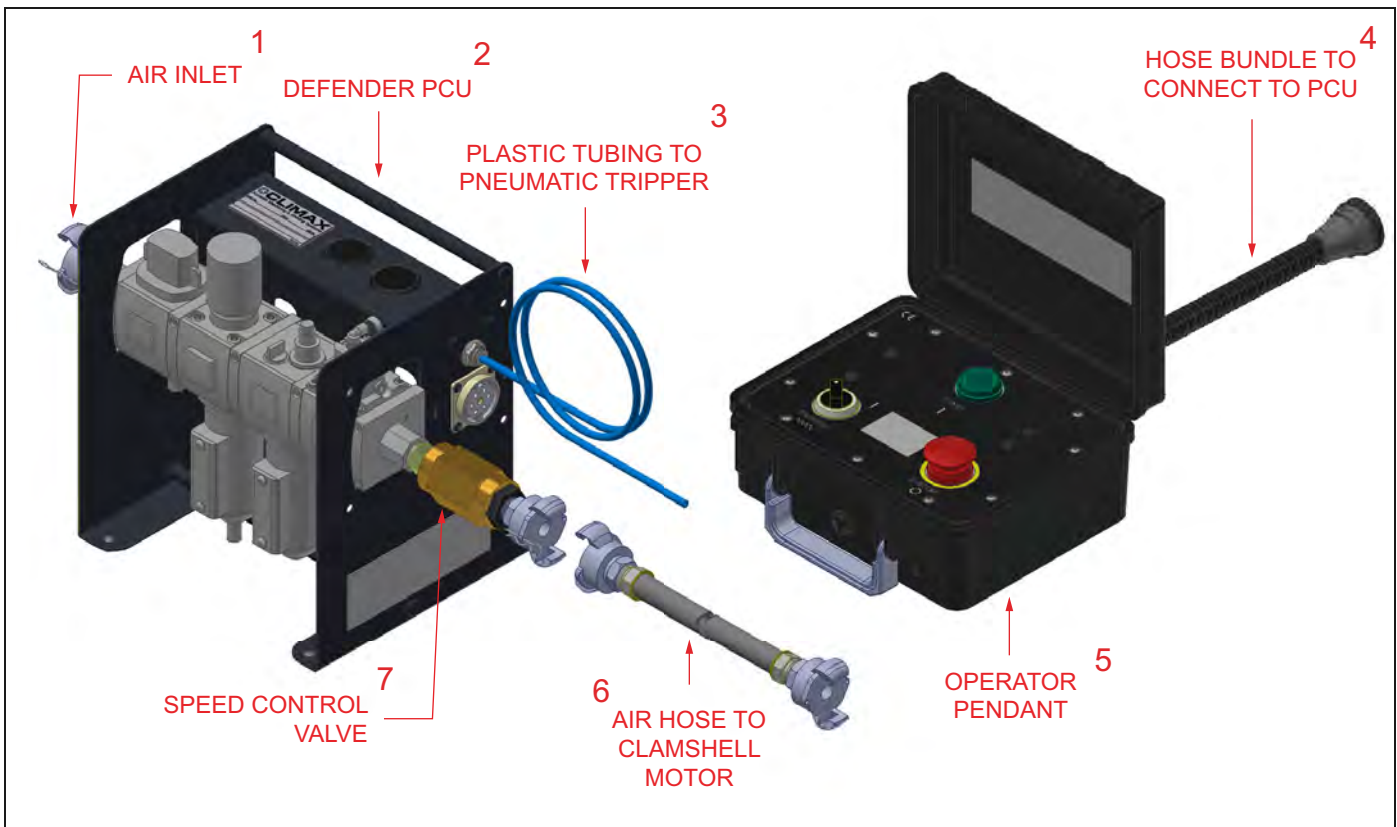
DEFENDER AIR CADDY AND PENDANT
